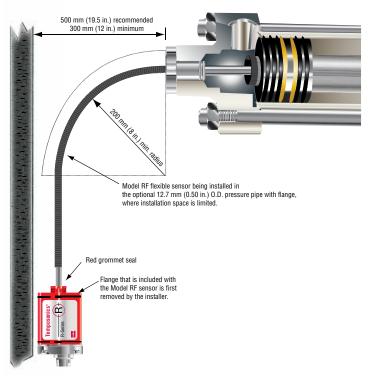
Installation example using optional 12.7 mm (0.50 in.) O.D. pressure pipe inside hydraulic cylinder
